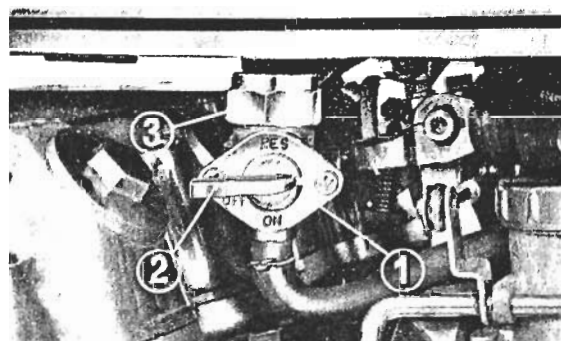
(1) Fuel cock (2) Lever (3) Fuel cock fixing nut
